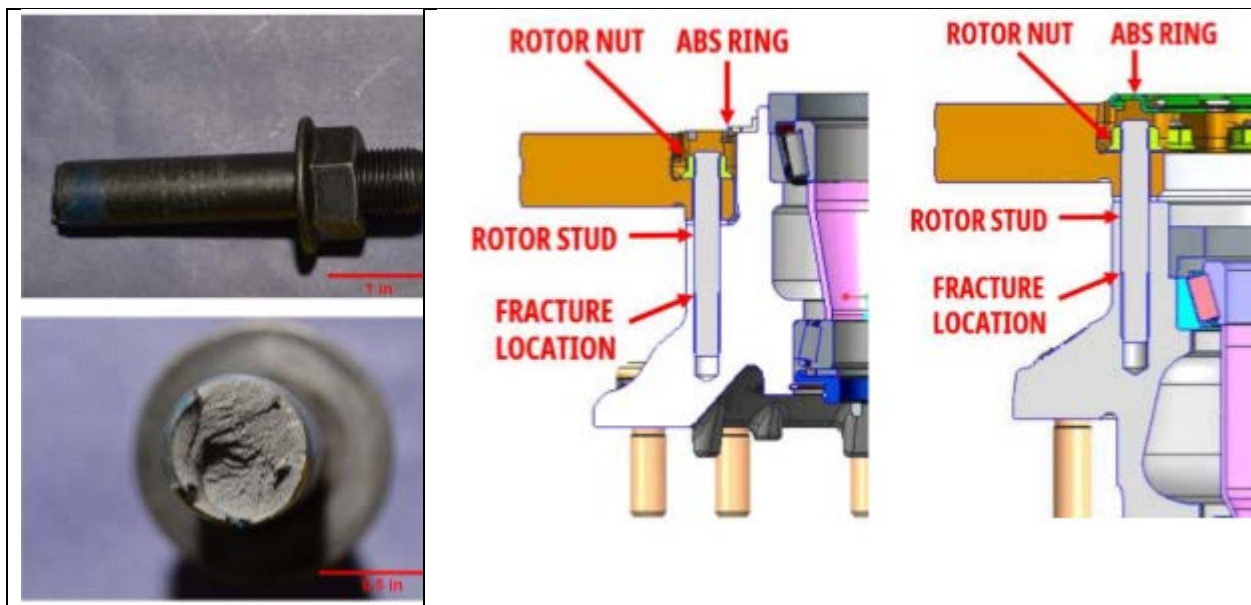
Rotor mounting stud fracture due to hydrogen embrittlement
